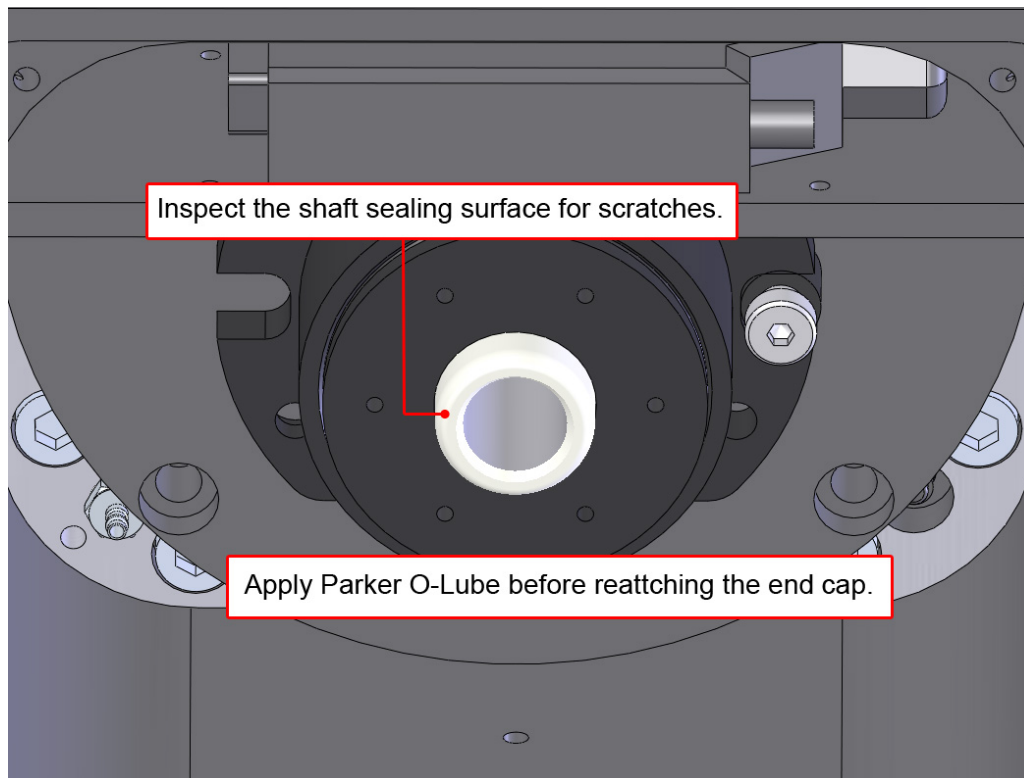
Wet Cut Rotary Union Shaft Inspection
